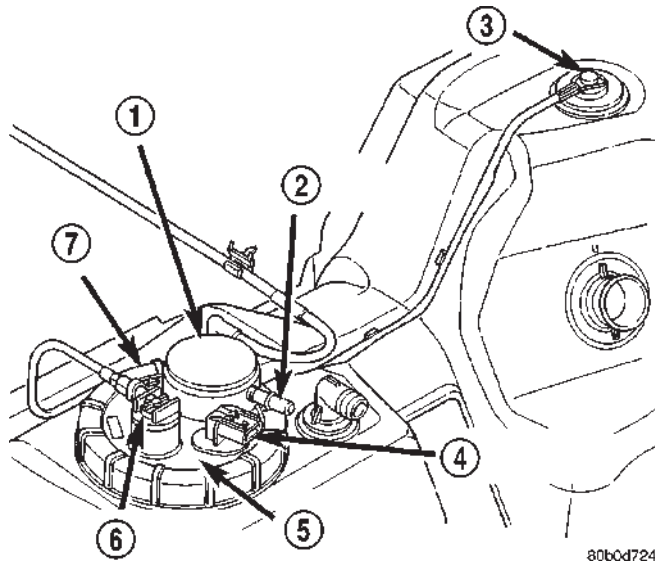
Rollover Valve Locations - Gas Powered - 26/34 Gallon Tank
